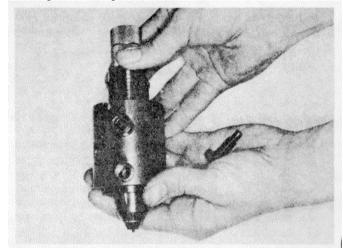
H-51. Centering the Injector Inlet in the St-1508 Inlet Hole
